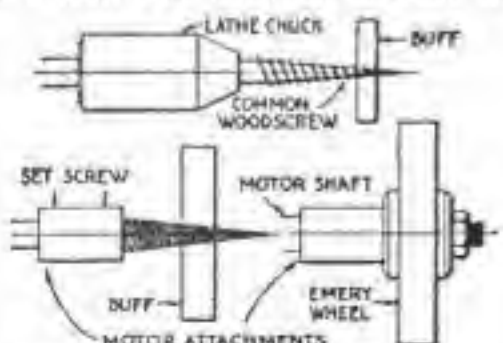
Attachments to fit the shaft of the ordinary electric motor allow it to be used as a grinding, buffing, polishing head.
